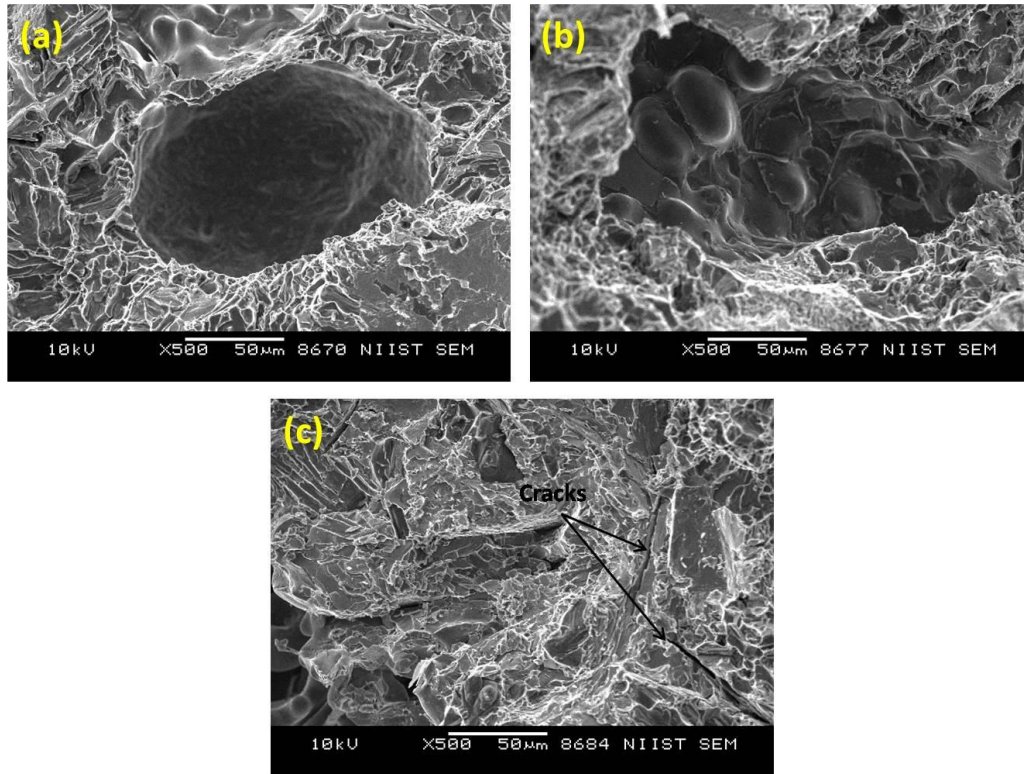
SEM analysis of fracture surface of A390-0.03 wt. % Sr (a) outer specimen (b) middle specimen and (c) inner specimen
